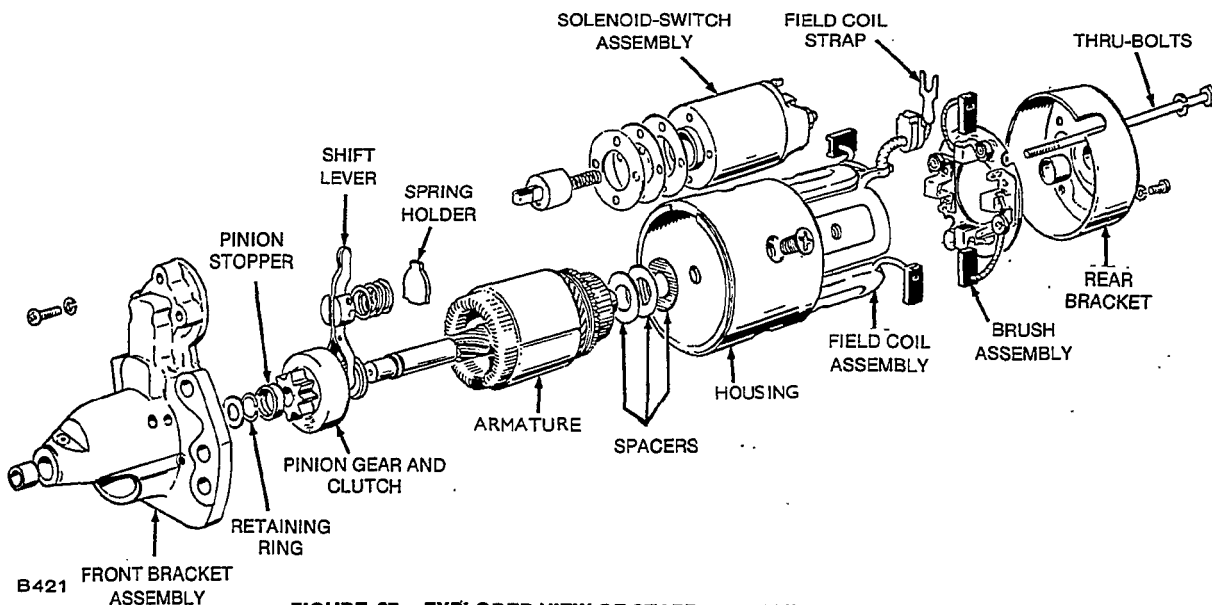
EXPLODED-VIEW OF STARTER (BEGIN SPEC B)
